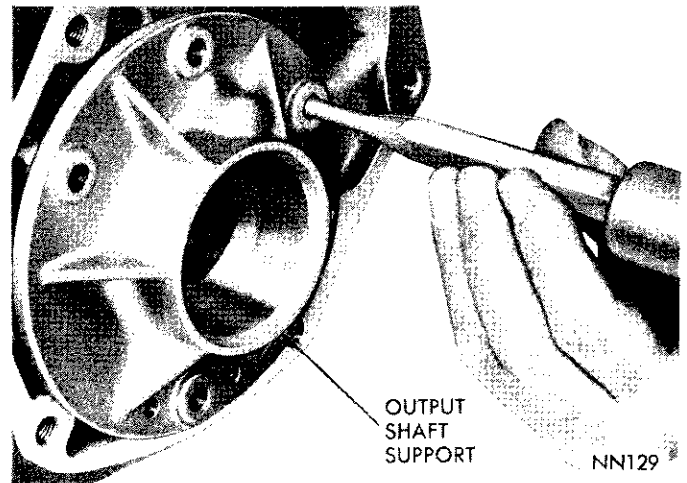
Removing Overrunning Clutch Cam (A-727)
